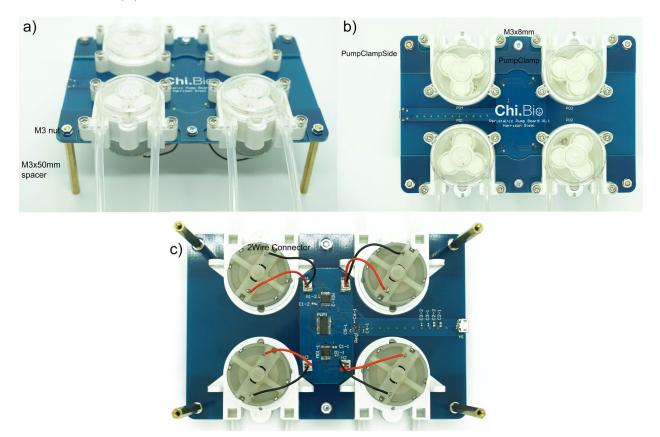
Assembly of the pump PCB, which uses four peristaltic pumps, M3x50mm PCB spacers, M3 nuts, and the PCBs PumpClamp (x2), PumpClampSide (x4), and Pumps (x1). Note that the pump board can be assembled with only two or three pumps, depending on the user's needs.
